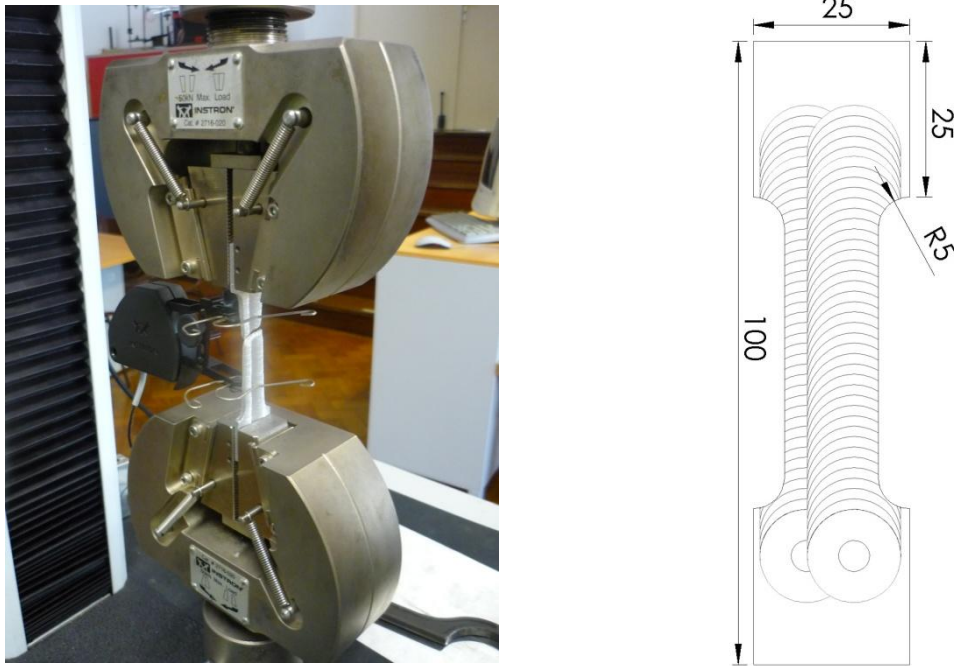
Tensile runs set-up and composite test samples dimensions.
